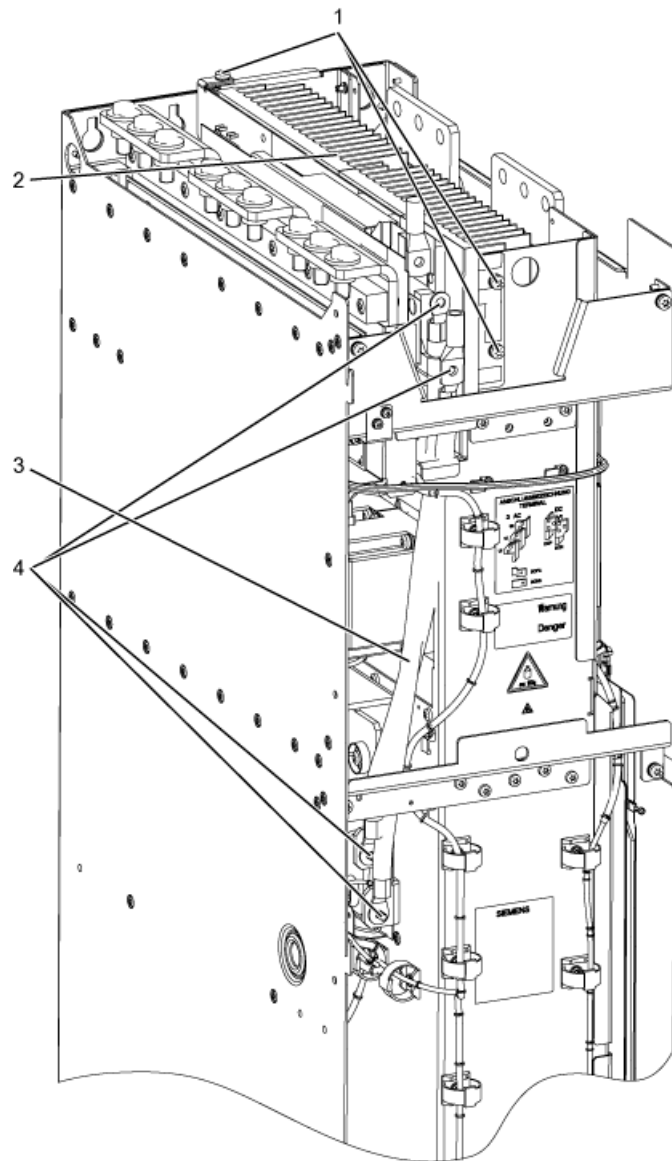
Installing the Braking Module in a Basic Line Module, frame size GB, GD
